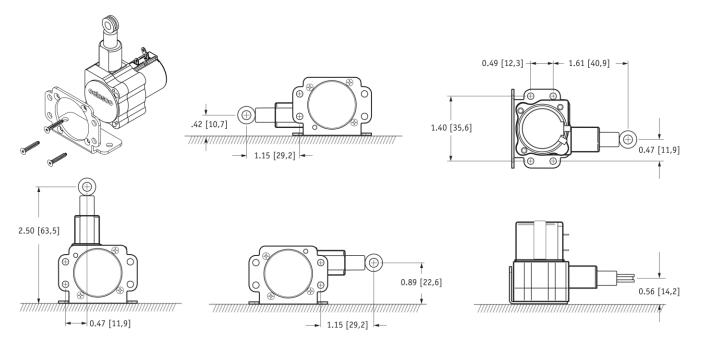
Outline Drawing (w/optional Universal Mounting Bracket)
